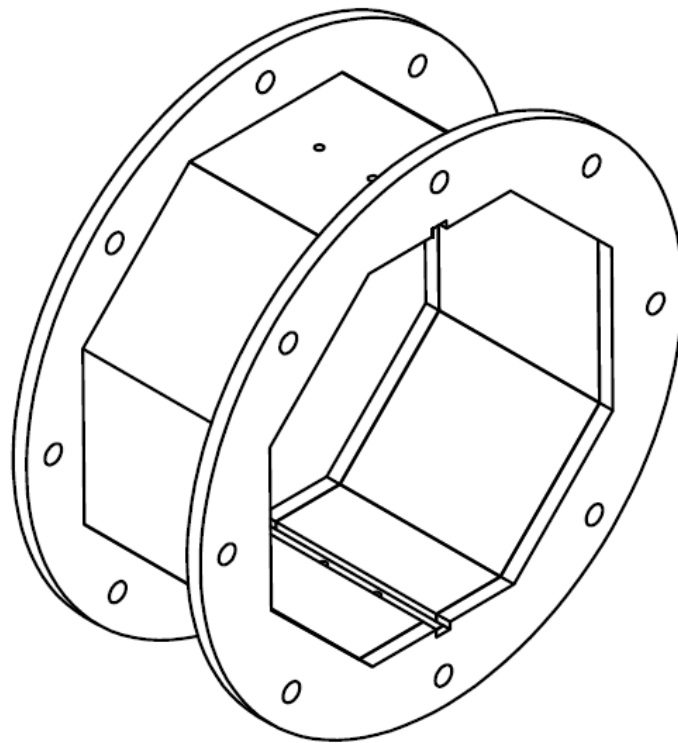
Diagram of wind tunnel test section extension assembly. The edges of each panel slot into the octagonal groove in the extensions to ensure proper fit.
